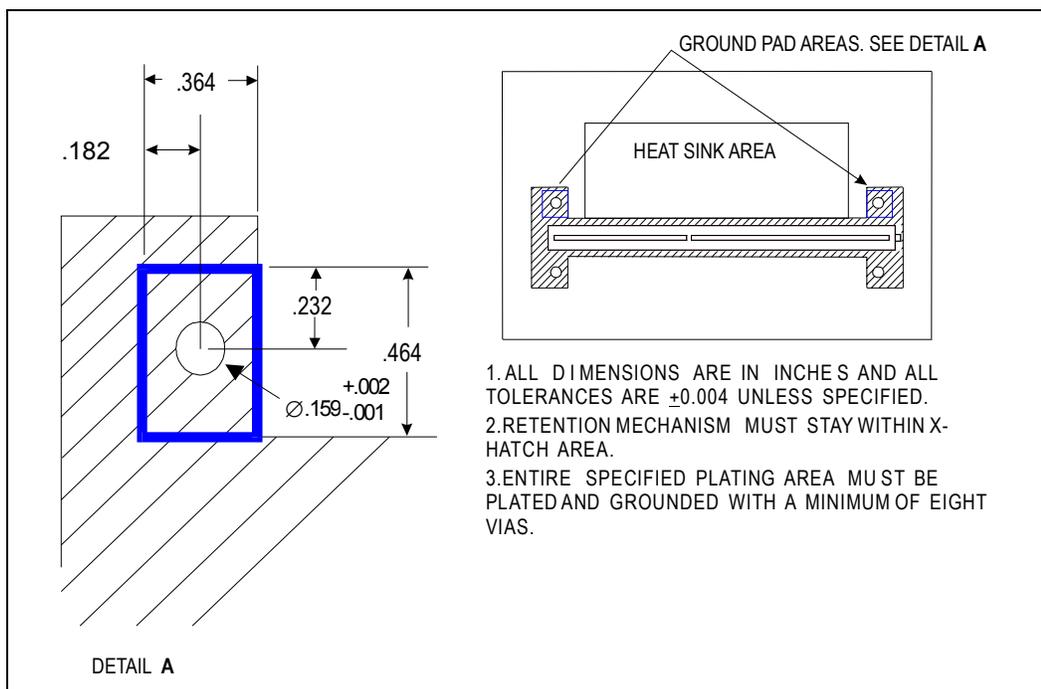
Hole Location and Keep-out Zones for Support Components
